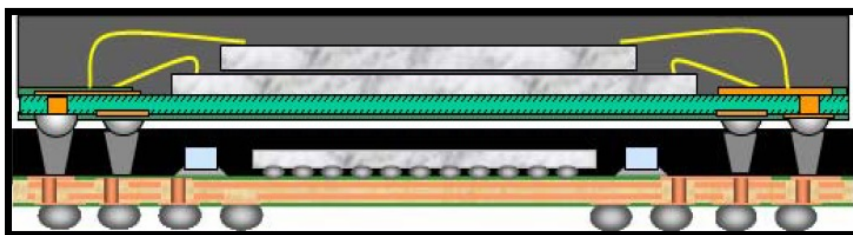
PoP structure by Amkor: Through Mold Via technology enables dense routing with reduced warpage in bottom package [17]
